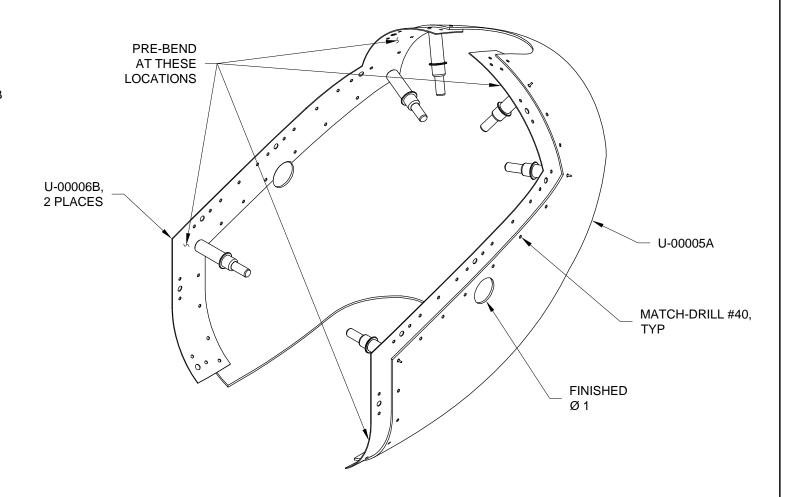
FITTING SPLICE STRIPS AND WHEEL FAIRING FRONT
